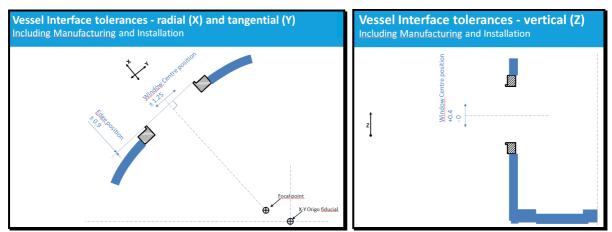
& 12.2 - Vessel interface tolerances
